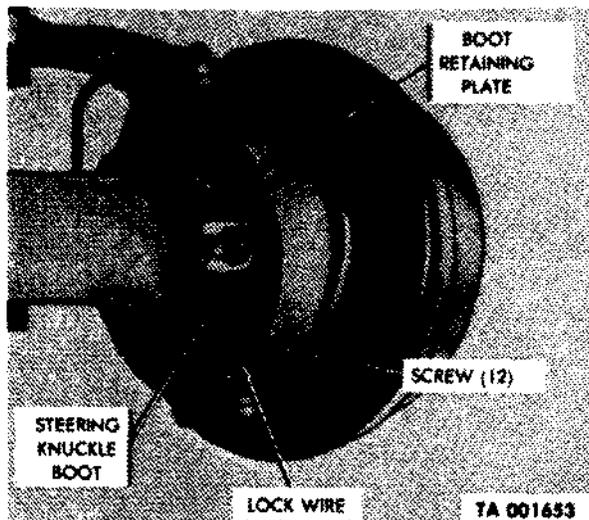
Steering knuckle boot removal and installation—outer retaining plate.
